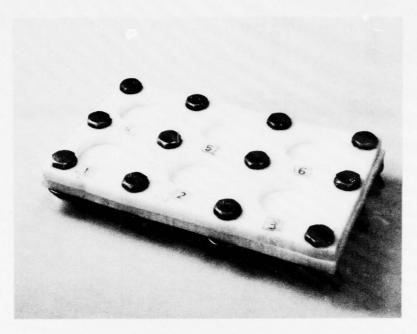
Mold for Forming Wafers of Sinter Filler Metal
